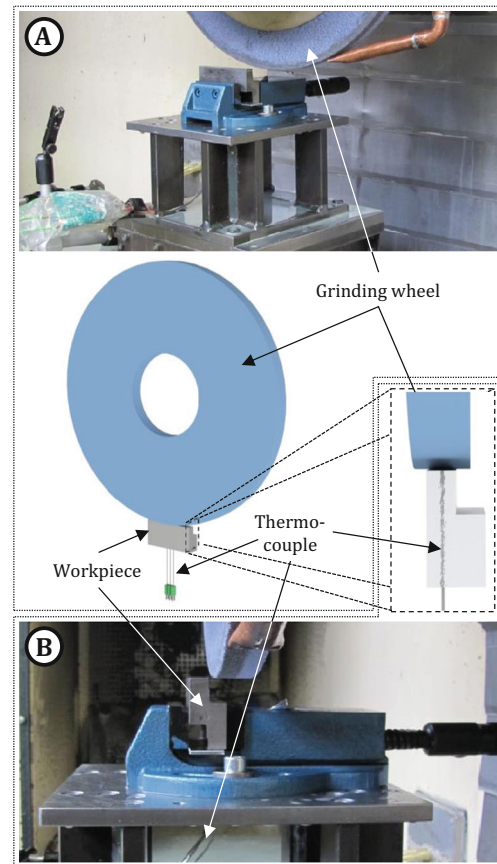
Experimental setup for workpiece temperature measurement using thermocouples. a Overview of the setup in the workspace. b Close view on the contact zone
